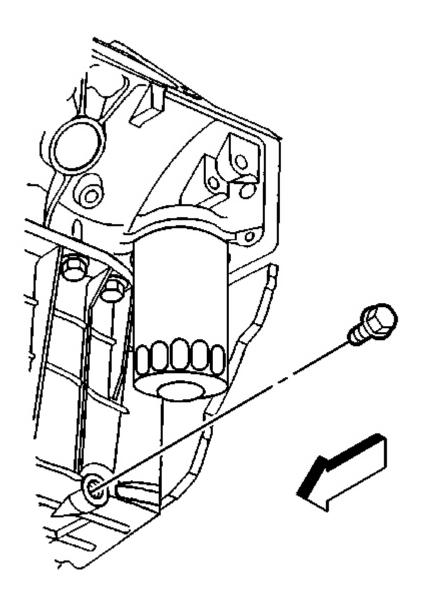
Identifying Oil Drain Plug Courtesy of GENERAL MOTORS CORP.
